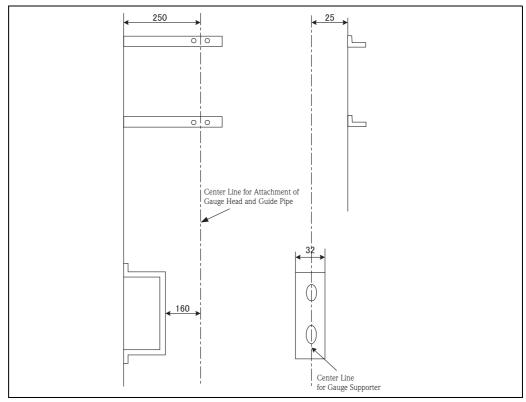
LT11/LT12 Gauge and Pipe Supporters
